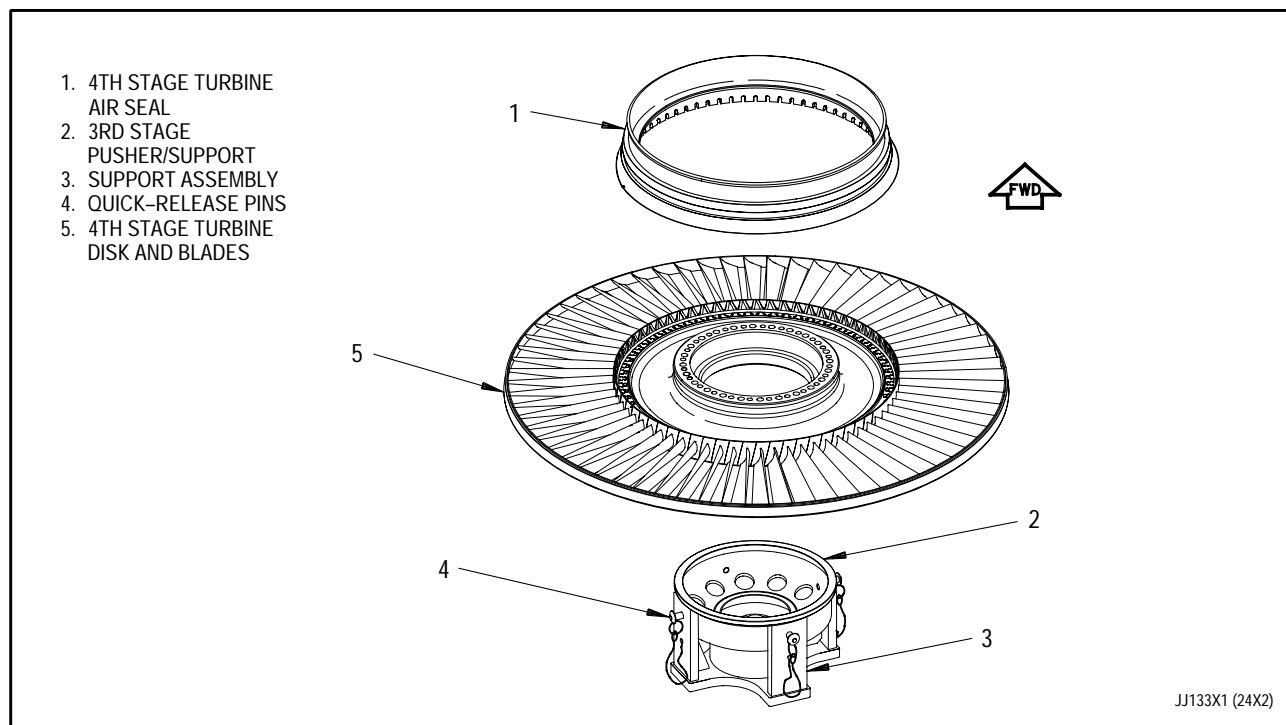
Fourth Stage Turbine Air Seal - Installation Onto Fourth Stage Turbine Disk and Blades
